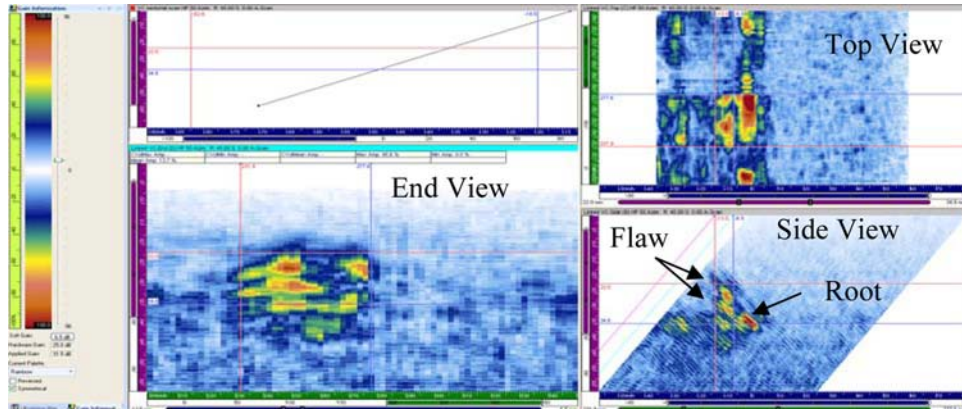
Specimen 9C-034 Flaw 3 at 1.5 MHz and 55° as Observed from the CASS Side of the Weld, with a Marginal Detection Before Weld Crown Removal
